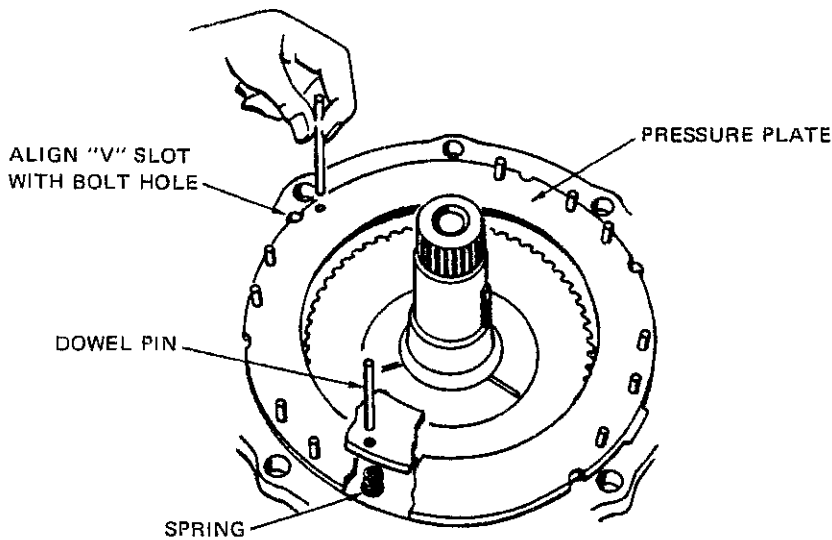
DOWELS USED TO RETAIN SPRINGS
